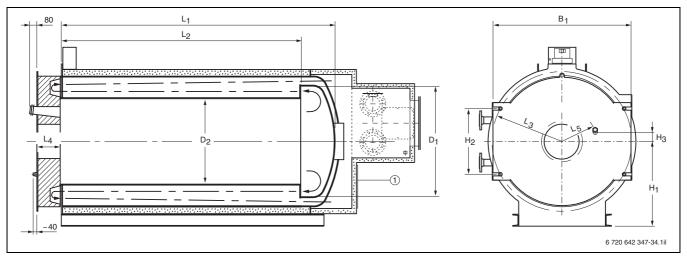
Combustion chamber dimensions Logano plus SB825L, boiler sizes 6500 to 19200 (dim. in mm)
